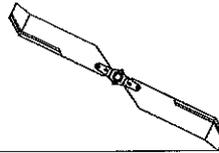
Nickel Abrasion Strip and Urethane Adhesive, exploded view
